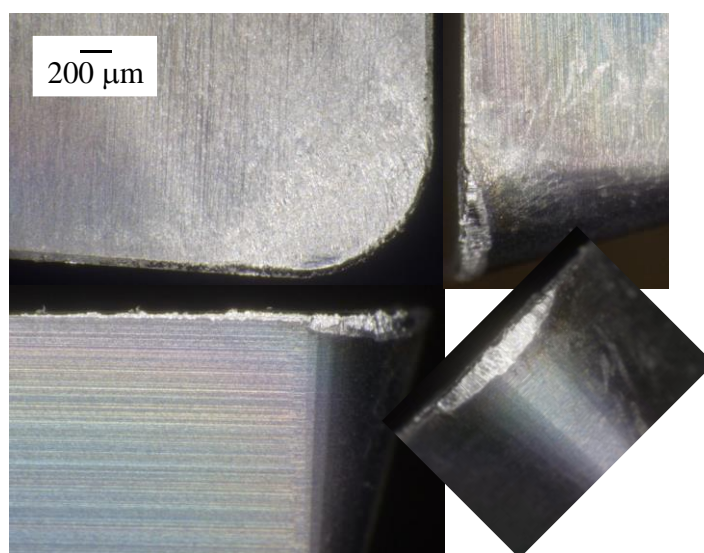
Each face of the insert in tool axis offset 6 mm after tool life experiment.
